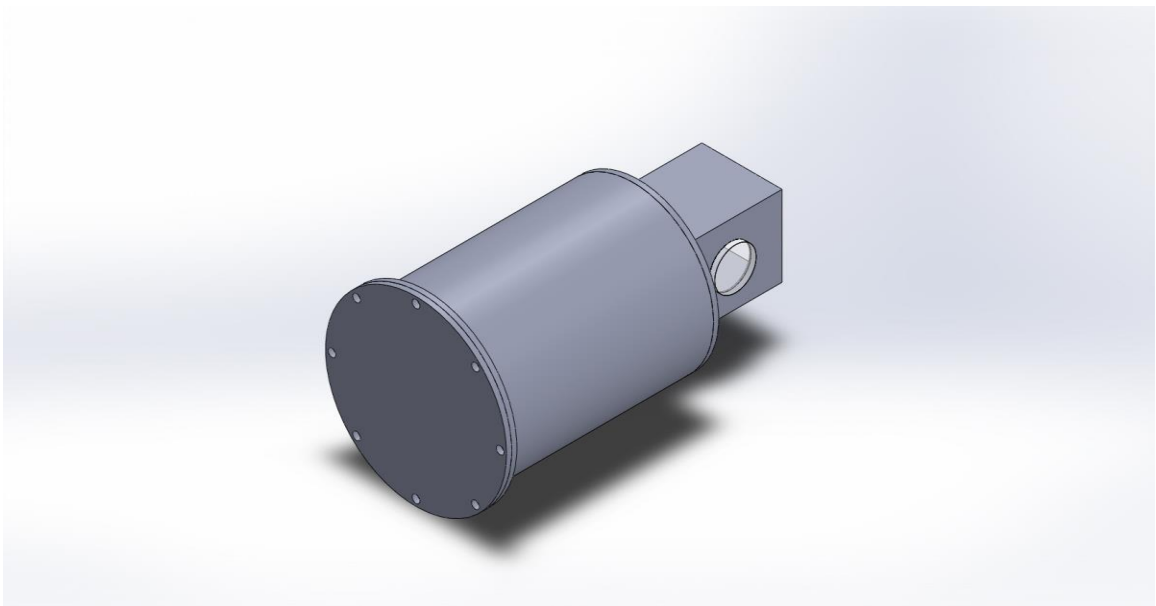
Isometric View of 3D Model Of Dump Tank and Test Section Assembly.
